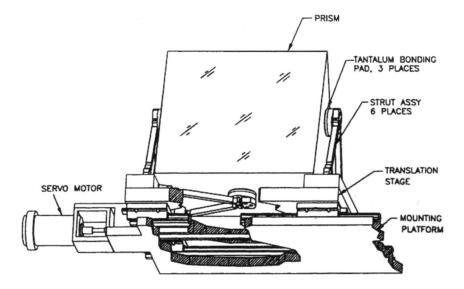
Sketch of the movable prism assembly showing its six-strut mounting configuration and translation stage. (From Sheinis et al.¹⁷)
